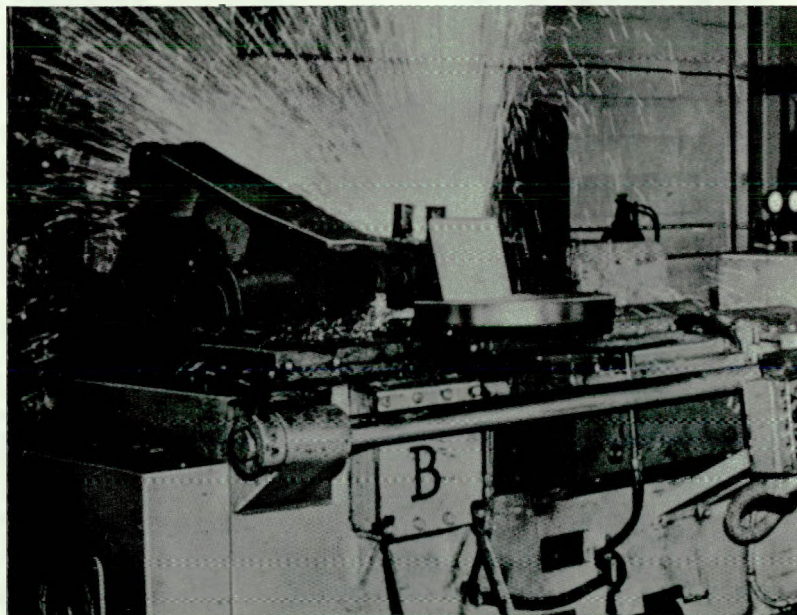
ILLUSTRATION OF A FLASH-WELDED JET-ENGINE RING (Ref. 56)
